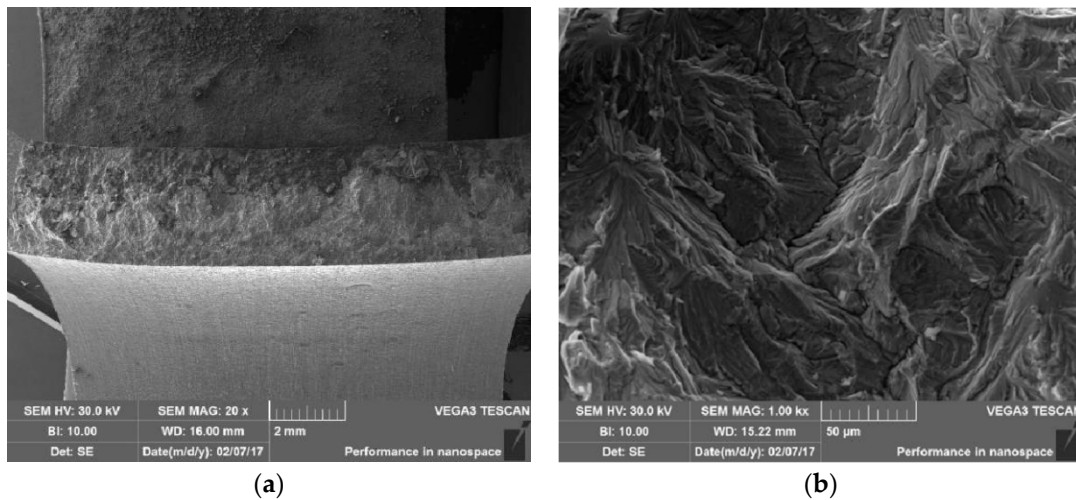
Fracture morphology of specimen 1#: (a) 20 \times ; (b)1000 \times .
